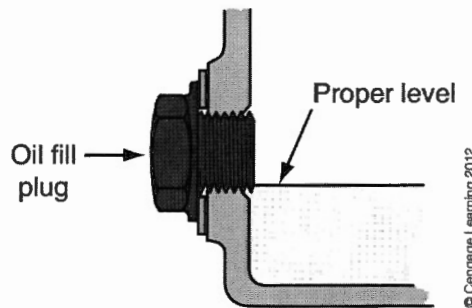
The fluid level should be at the bottom of the fill plug hole.
